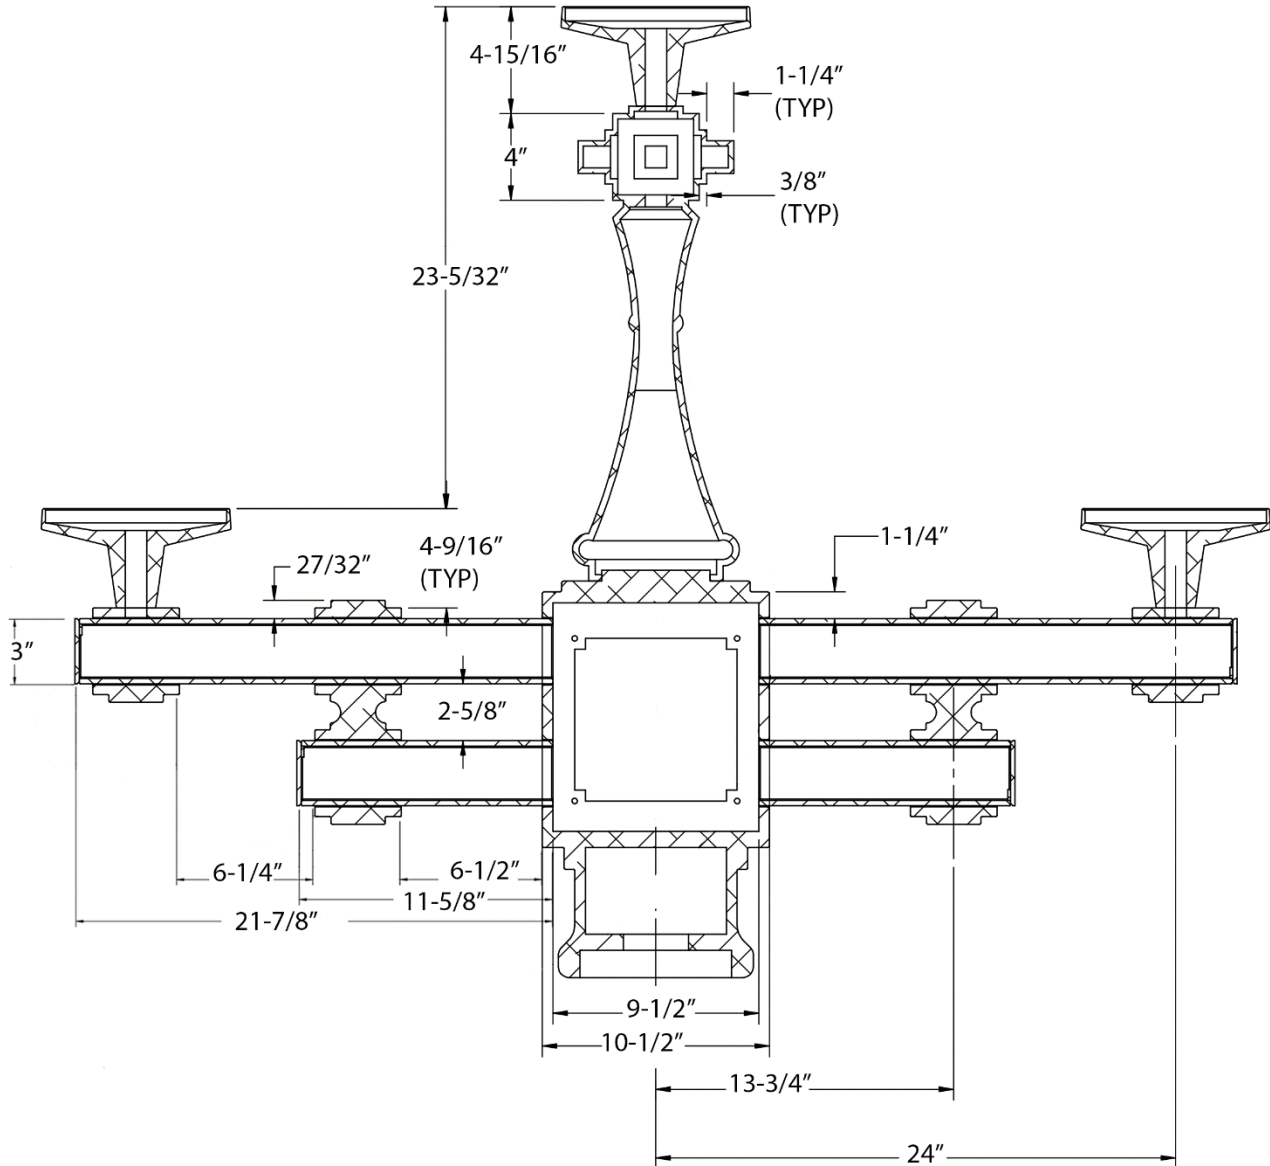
Three-Ball Globe Arm Assemblies, Overall Dimensions, Nominal
